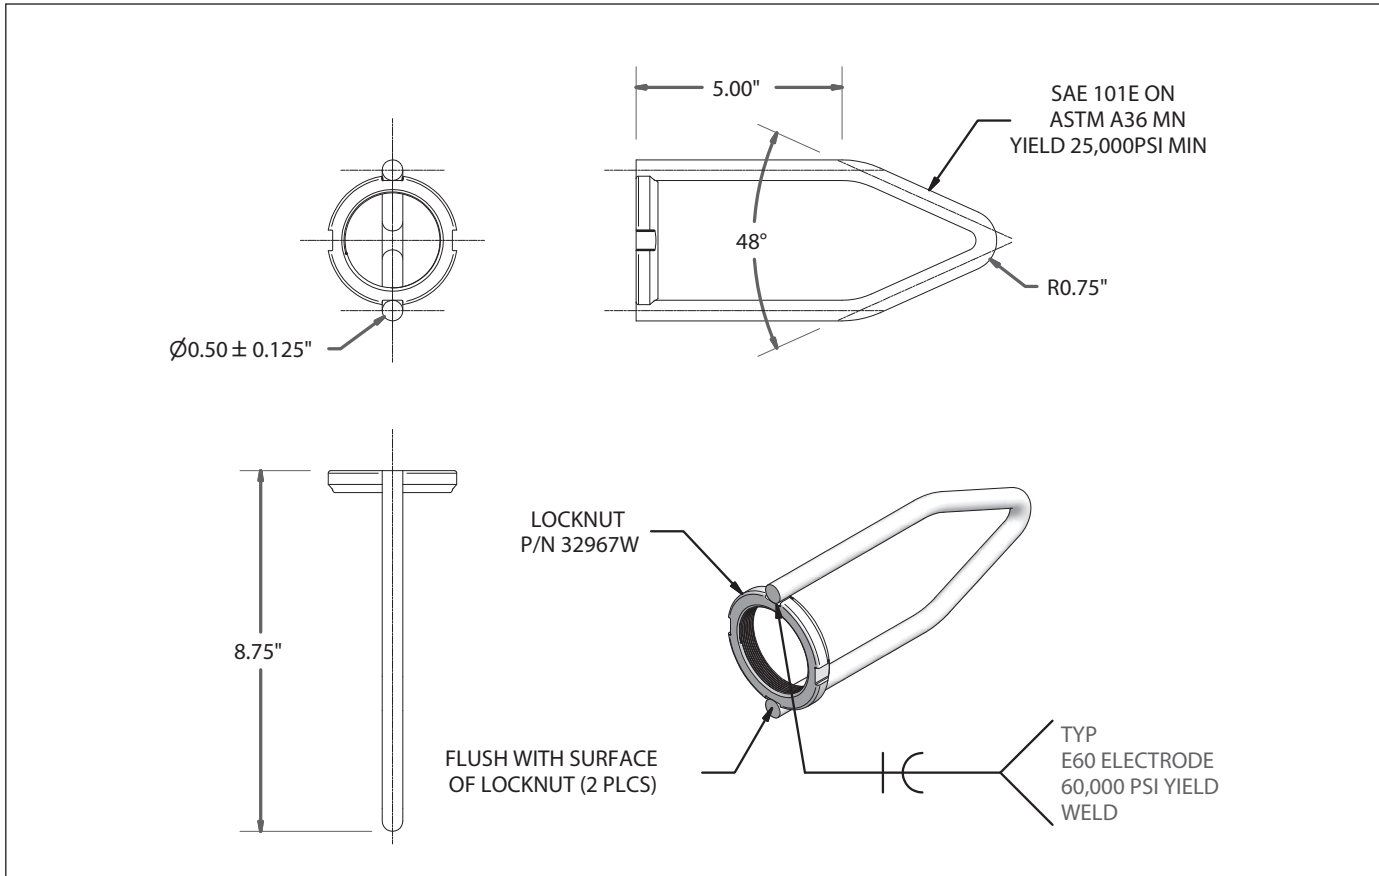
Clutch Shaft Puller (may be used instead of Clutch Shaft Driver)
